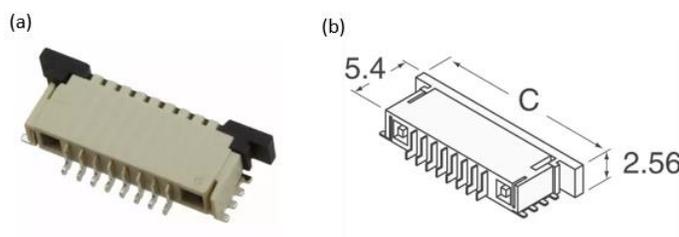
(a) Sensing strip connector photograph. (b) Sensing strip connector dimension drawing.
